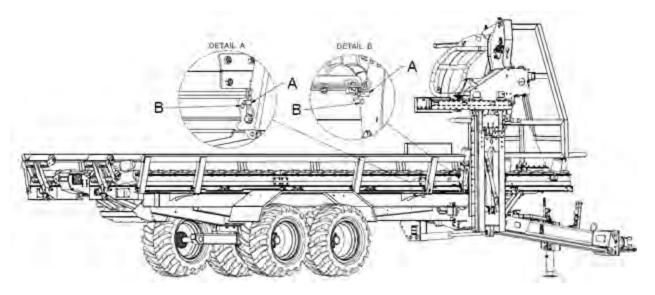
Adjusting the Bale Guides (Detail A) and Bale Guide Roller (Detail B)
